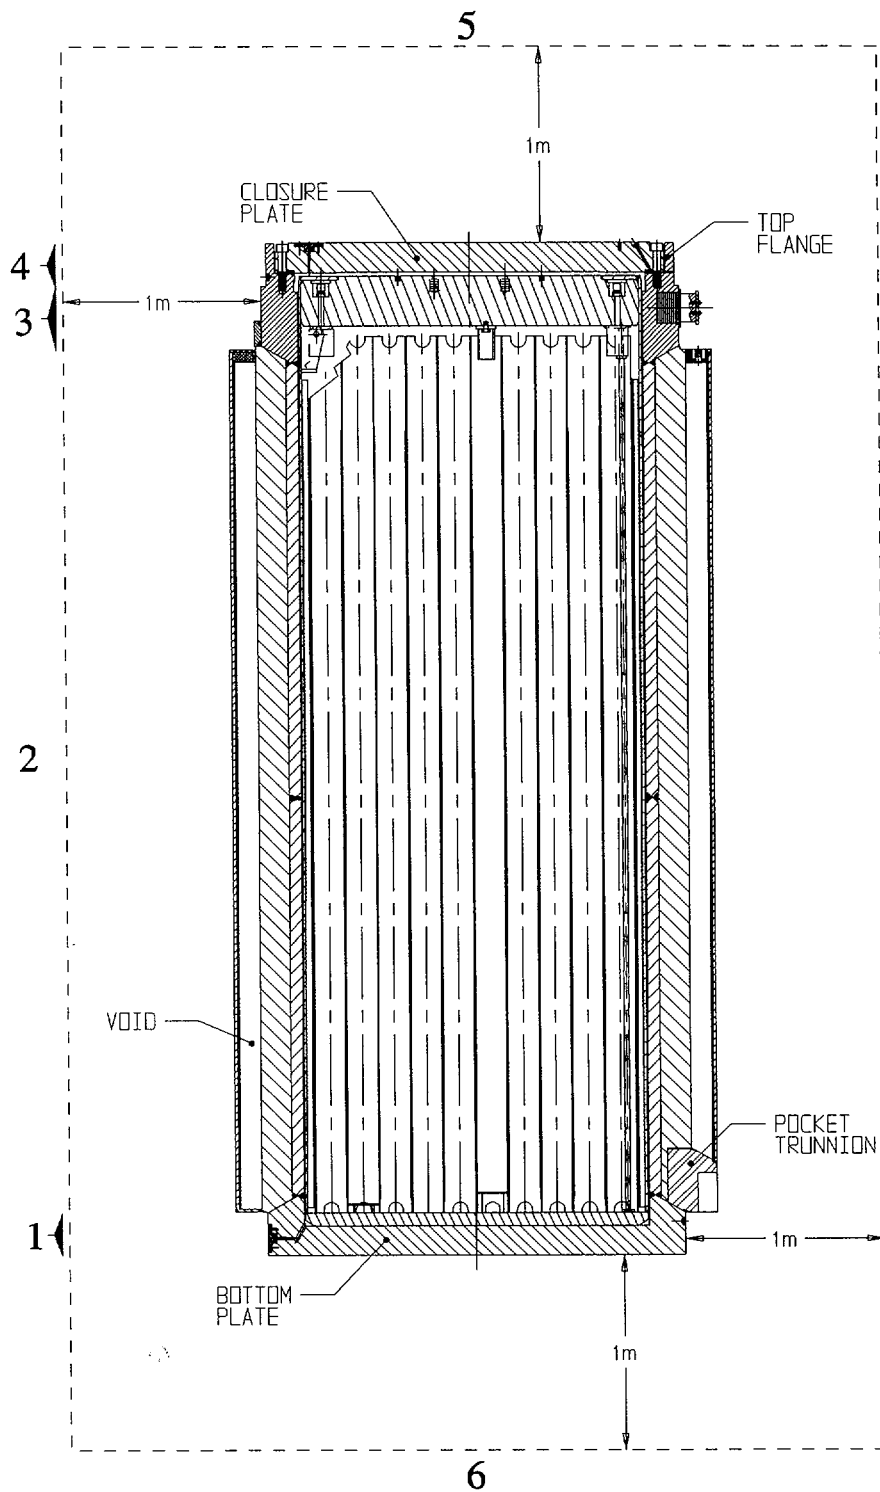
; CROSS SECTION ELEVATION VIEW OF THE HI-STAR 100 SYSTEM
